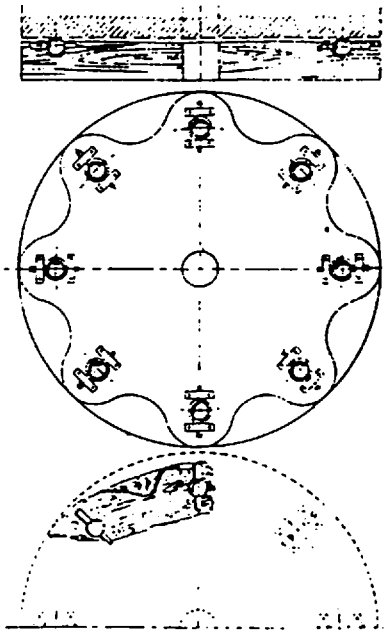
The thrust roller bearings used for rotating potters wheel.
